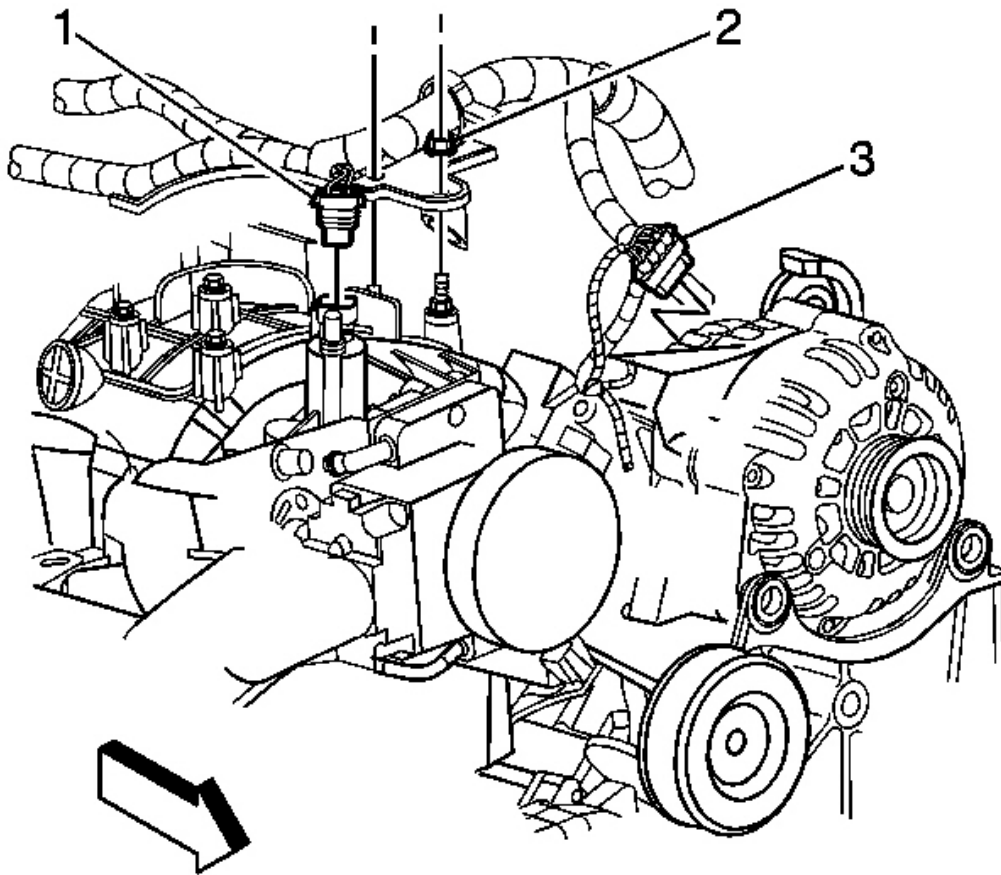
View Of EVAP Canister Purge Solenoid & Generator Electrical Connectors & Bracket Nut
